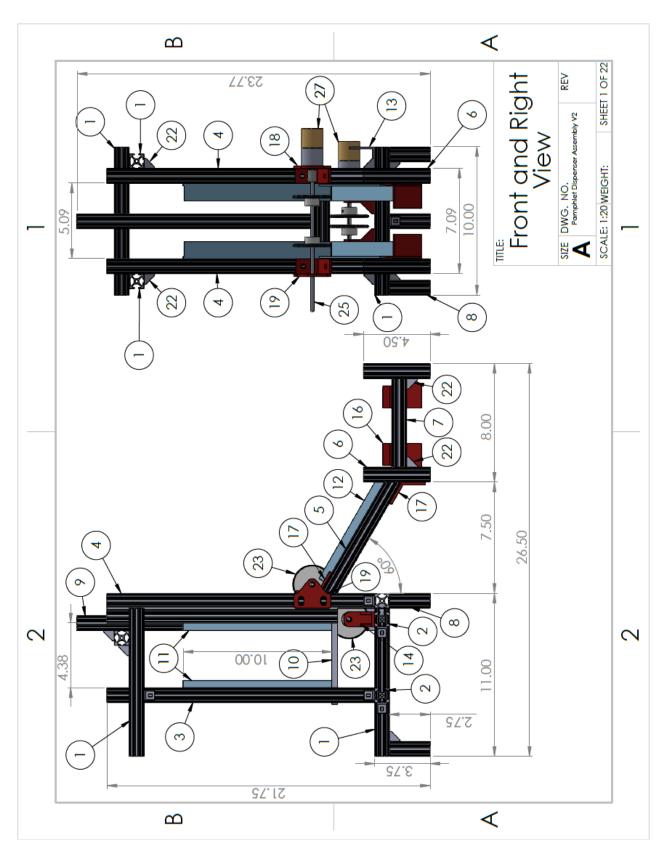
Pamphlet Dispenser Assembly Drawing (not to scale) \$170\$
